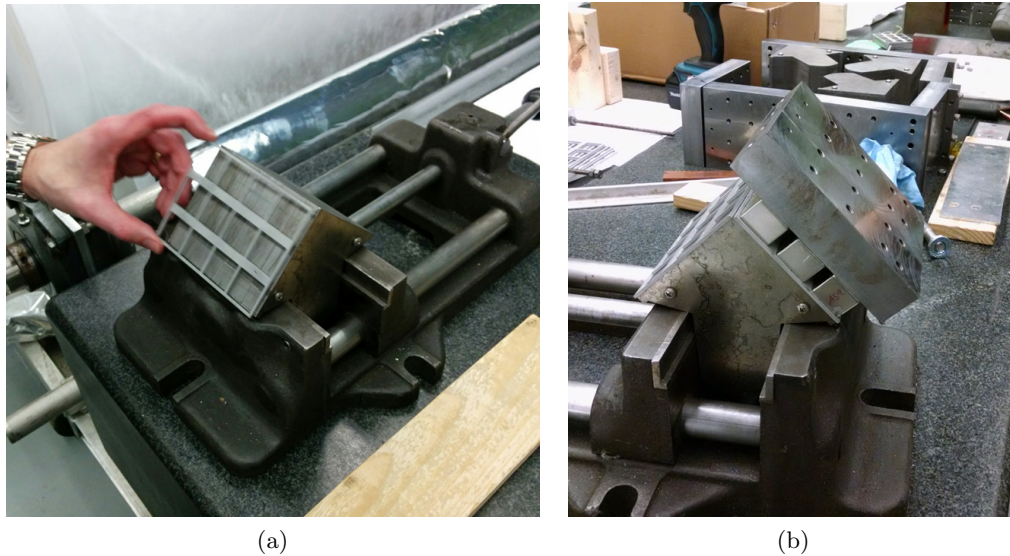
(Left) Grid which is used to assemble the permanent magnets on the iron pole. Assembly of a single section of the Qd magnet (right).
